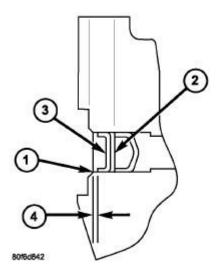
Oil Gallery Cup Plug Courtesy of CHRYSLER LLC
